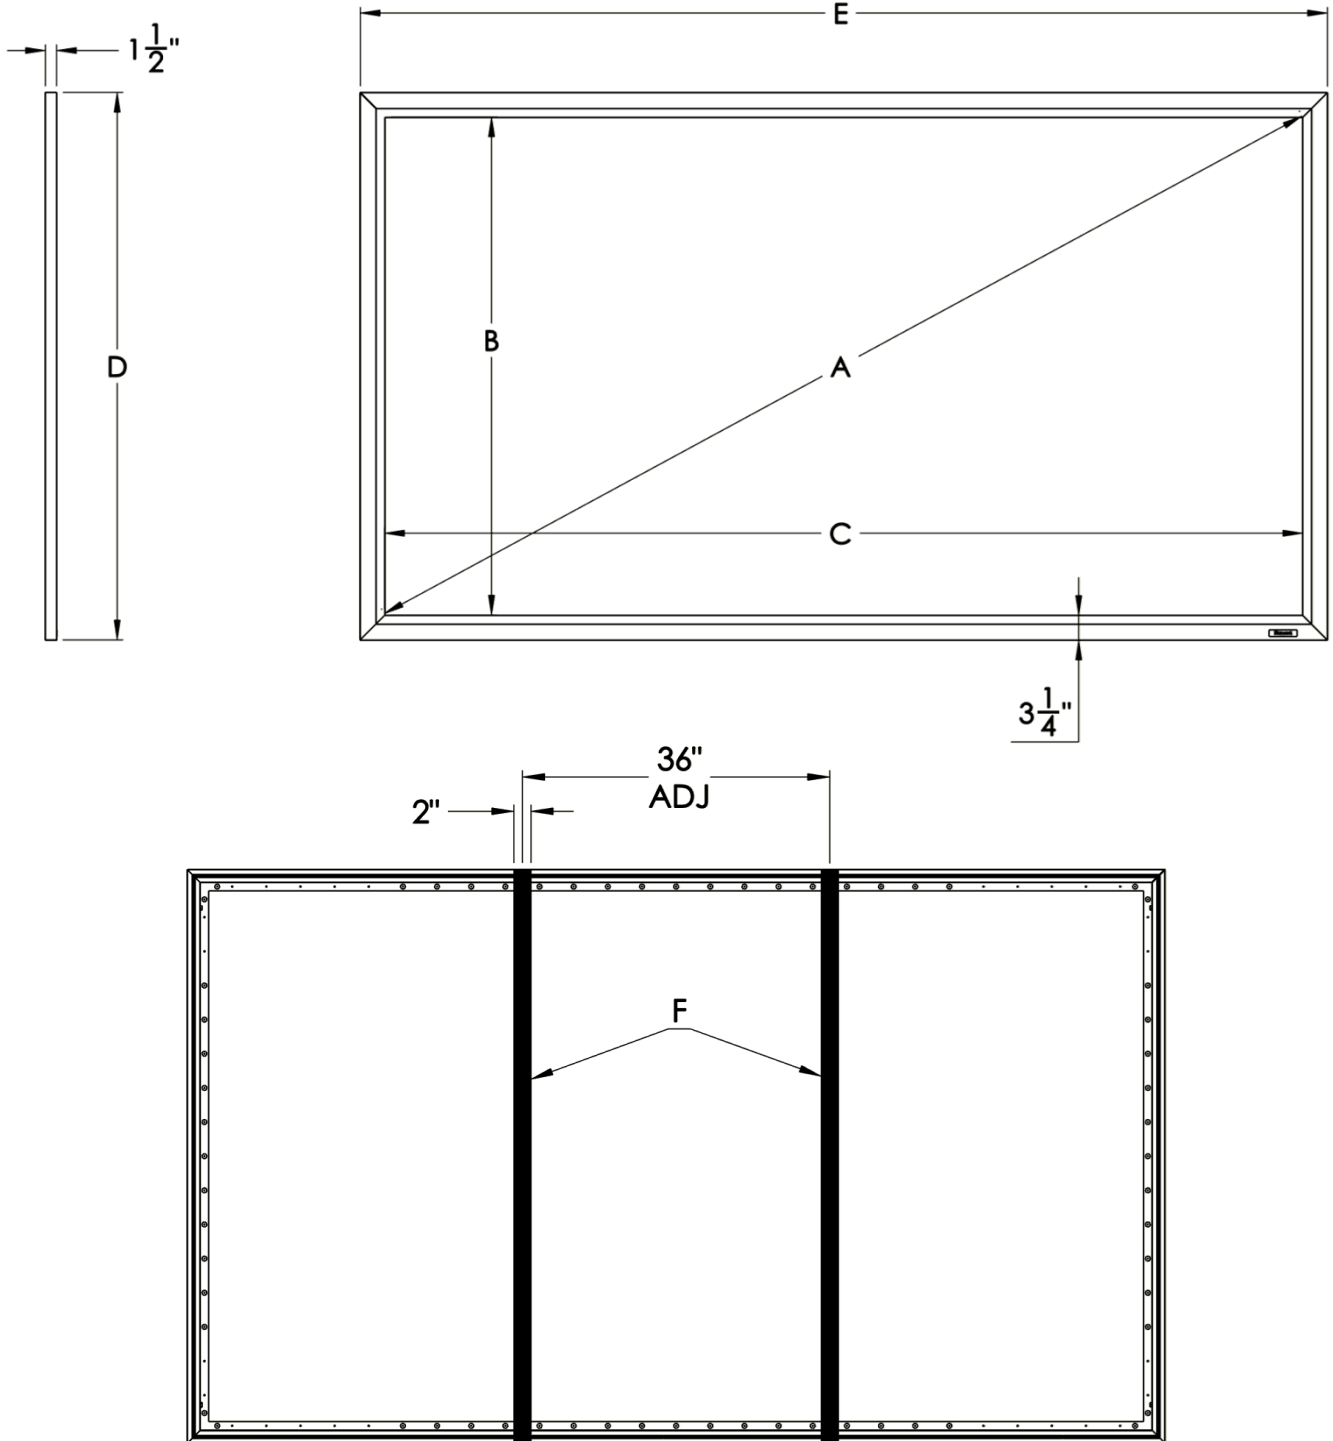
Basic front, side, and back view drawing with letters for dimensions. See tables below for appropriate aspect ratio and dimensions. Frame Width dimension does not include back brace or mounting.
